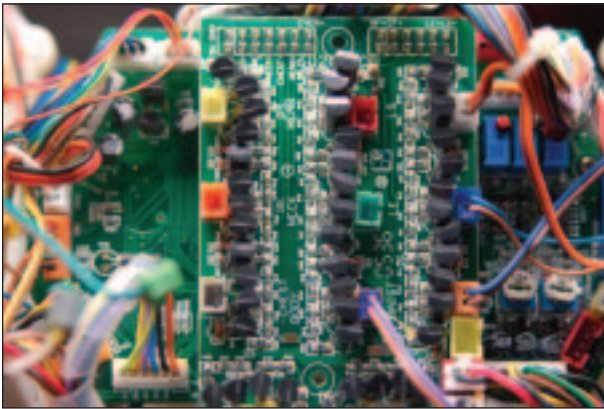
This photo shows RSV2's driver board. It would appear that the 44 transistors make up 11 H-bridges to control the 11 main motors. RSV1 had a dedicated motor driver chip.
